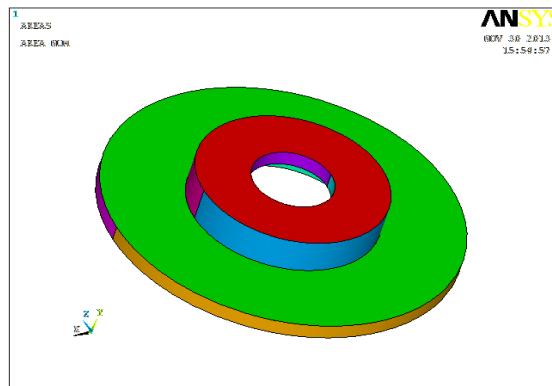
Solid Model of Rotor Disc in ANSYS after Removing Holes & Fillets
